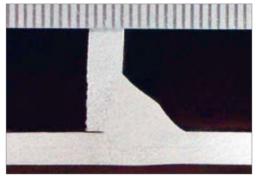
Weld penetration profile fillet weld. a=2mm; t=2mm; Vs=150cm/min. Shielding gas: 82% Ar/18% CO_{2} .
